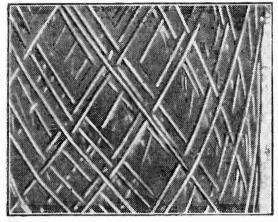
An enlarged view of the wave-winding produced on the machine.
